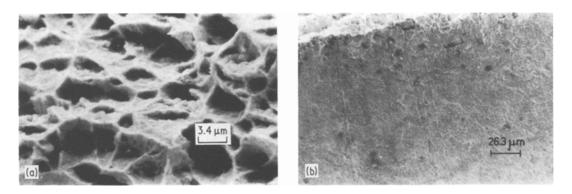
A specimen tested to fracture at room temperature at a cross-head speed of 166.66 mm ksec⁻¹. (a) Fracture surface and (b) side wall close to the fracture surface.
